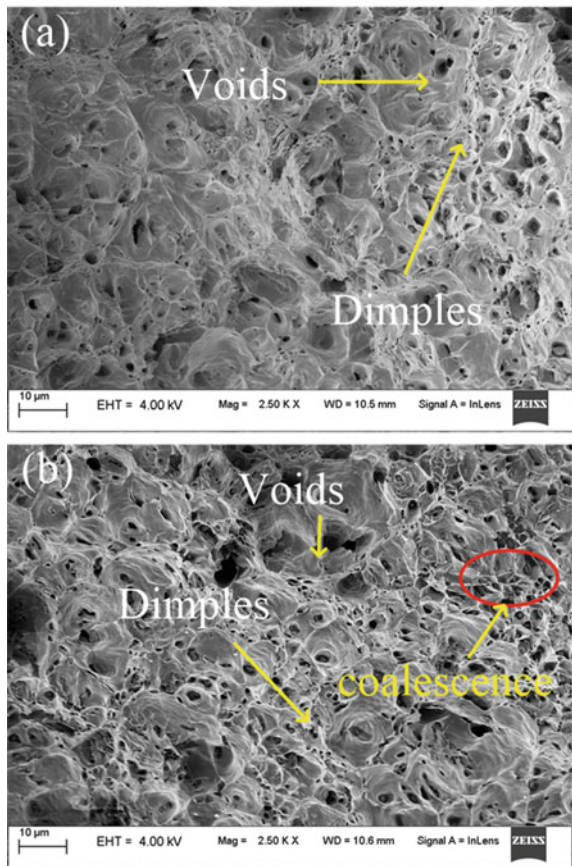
FESEM images of fractured tensile samples of weld 1 and weld 2
